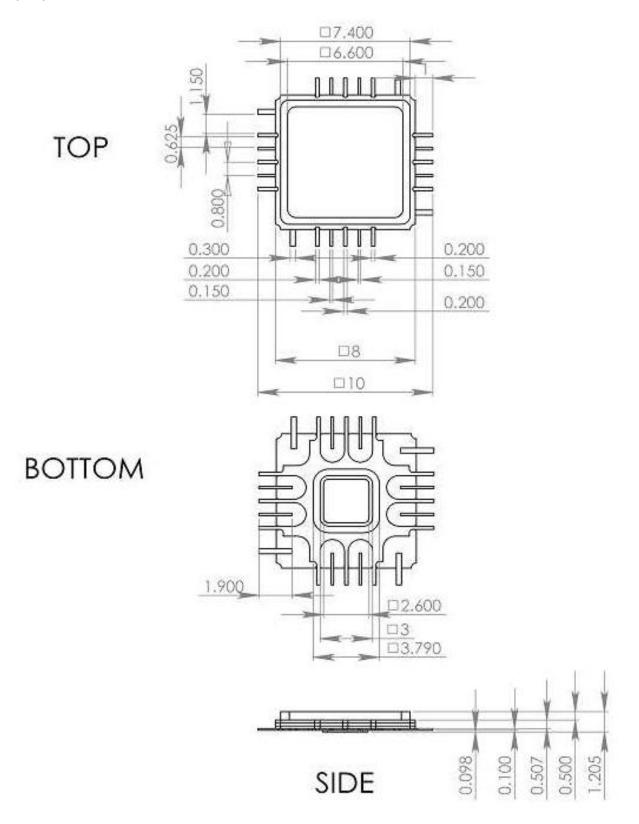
CQFP 24-Pin Package Drawing (All Dimensions in mm)
